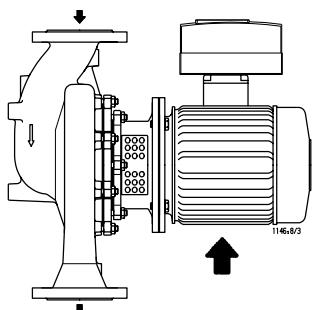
Horizontal installation, direction of flow from top to bottom.
